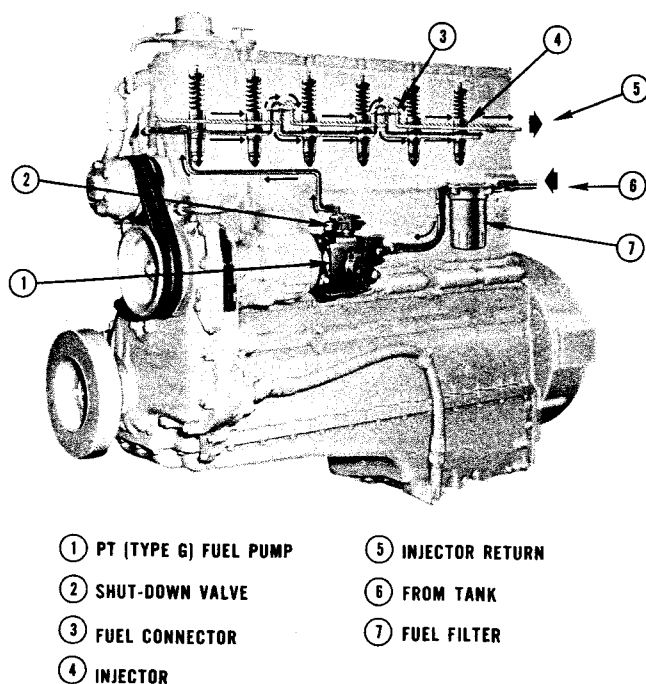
, (FWC-13). Fuel flow diagram — PT (type G) pump and cylindrical injectors — Inline Engine
